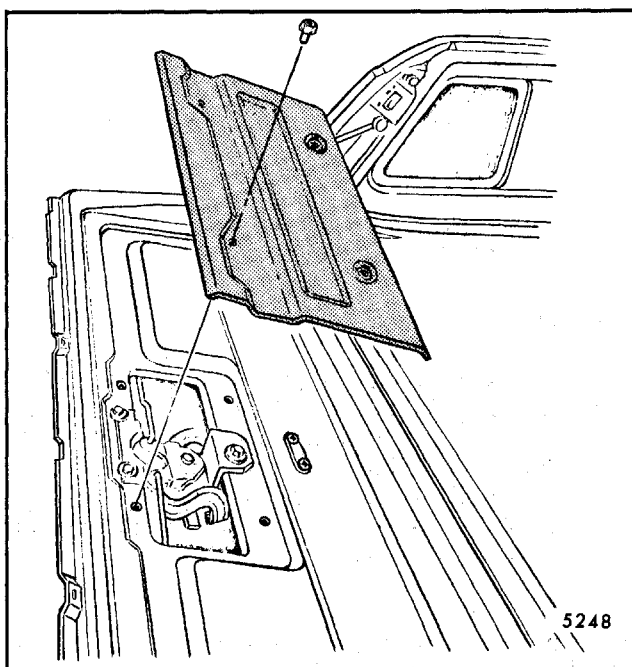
Tailgate Inner Panel Access Hole Cover
